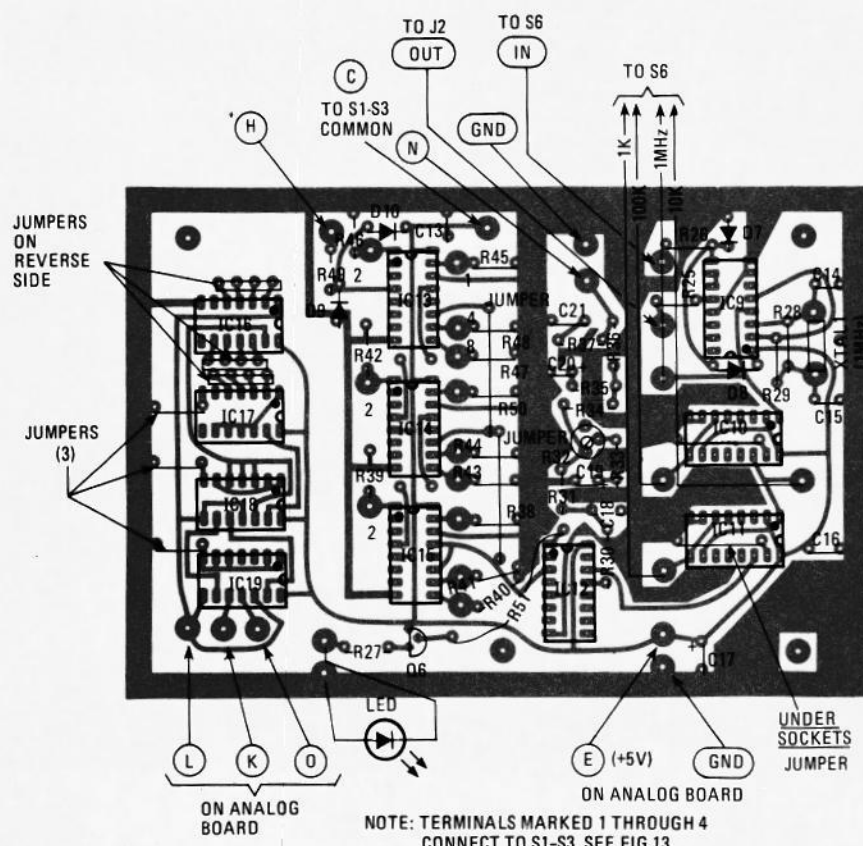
HOW PARTS ARE POSITIONED on the digital board. Follow text for wiring sequence for easier assembly. Don't forget the jumpers that are on the foil side of the board.
